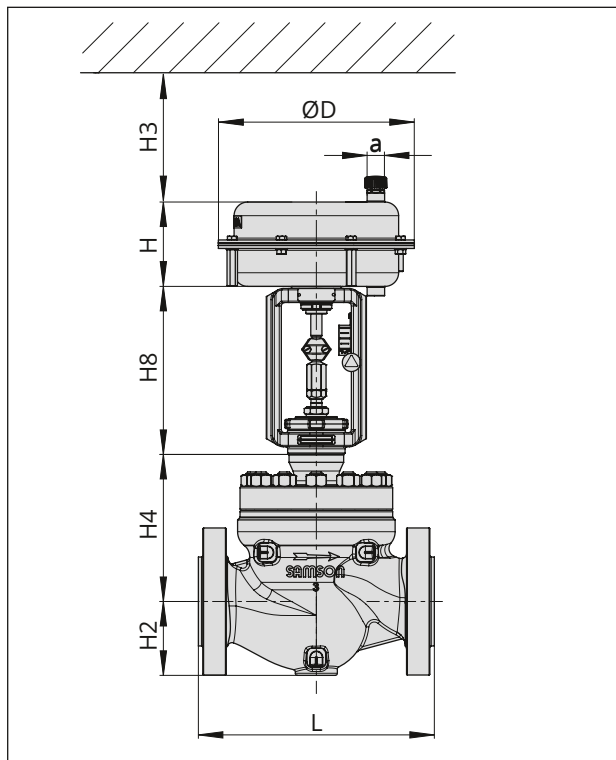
SMS MG-1 Control Valve: Type 251GR Valve with Type 3271 Pneumatic Actuator
